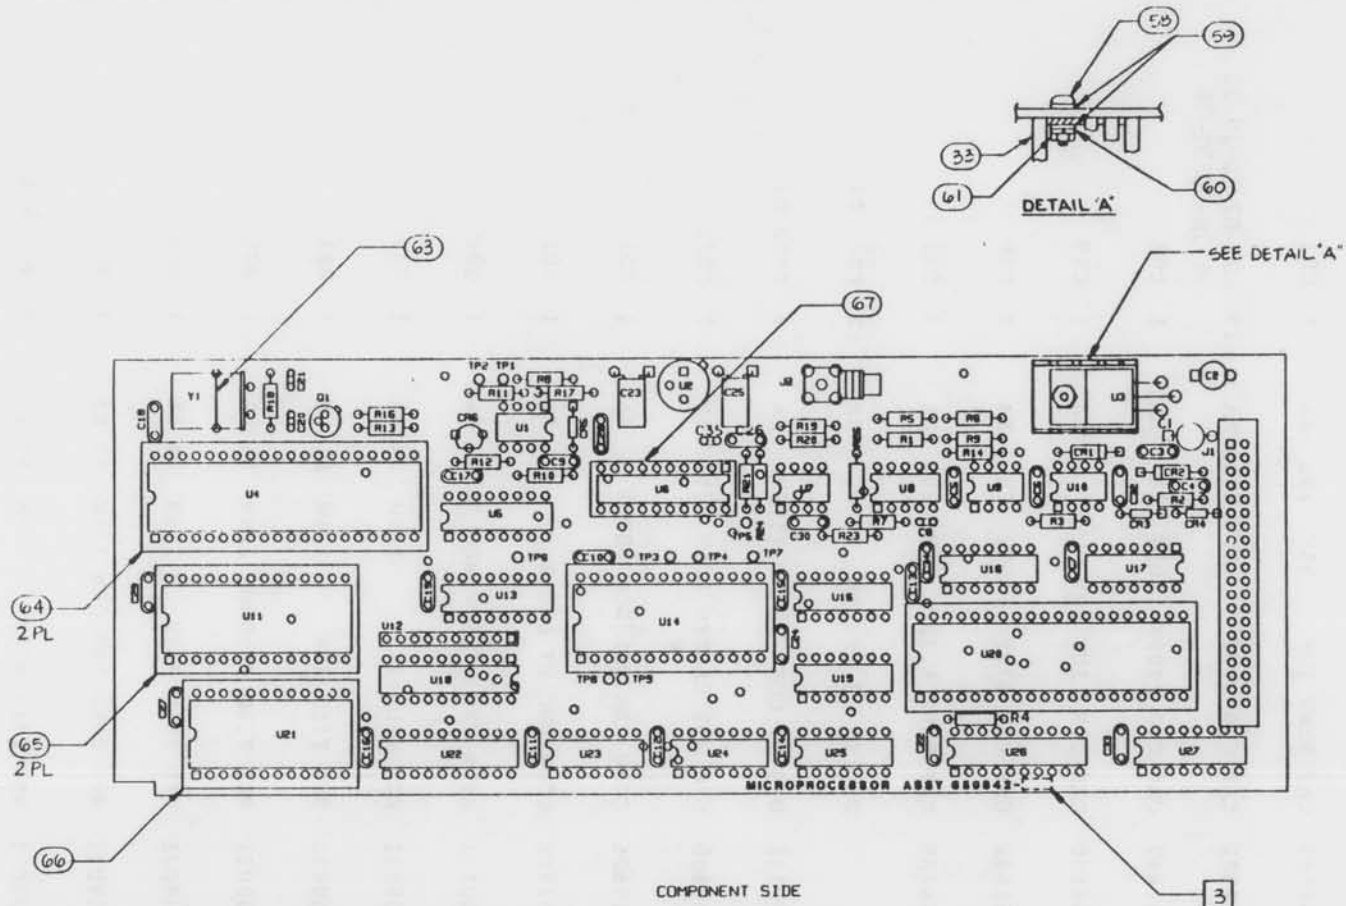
Dual YIG Filter Driver Logic Controller CCA A7A1 Parts List, Part No. 660120 (Sheet 1 of 3)
